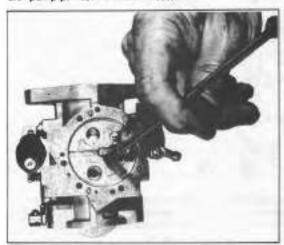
Cheaking Economises Ball Check Valve for Leakage
